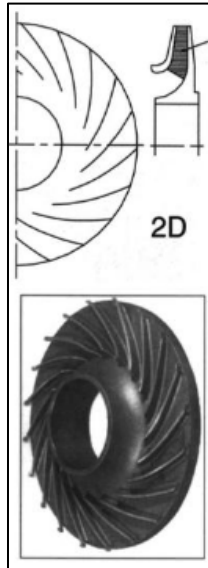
15 2D-impeller, shrouded with backward-curved blades. [3]
